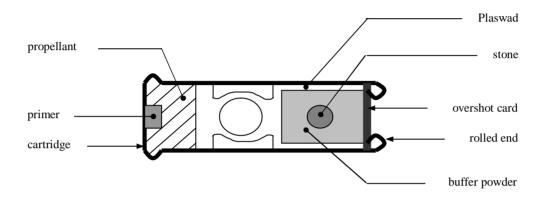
Cross-section of a loaded 12-gauge shotgun cartridge
